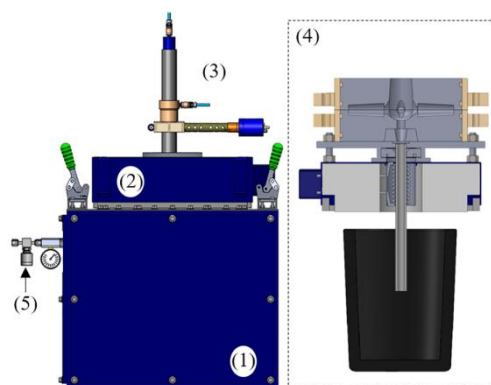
Experimental set-up of LPSC process. (1) Electrical furnace; (2) Sealing cap; (3) US-degassing system; (4) Device for filling mould; (5) Pressurizing gas.
